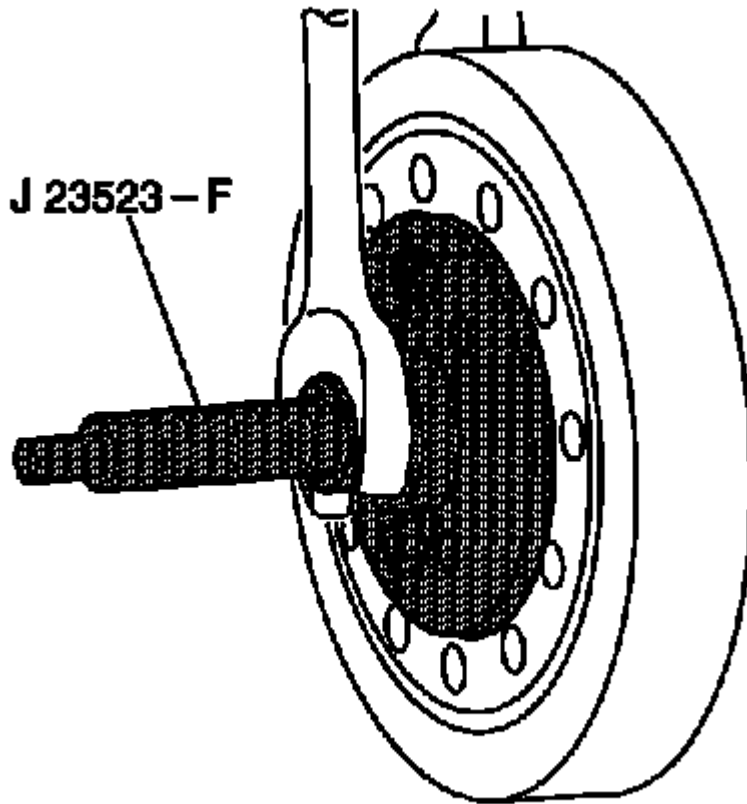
Pressing Crankshaft Balancer Onto Crankshaft Using Special Tool J 23523-F
